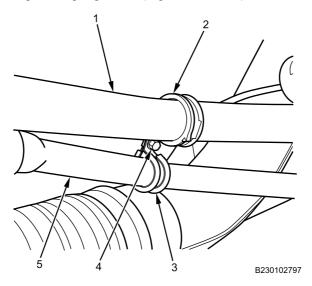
Oil Gauge Tube and Transmission Dipstick Retainer.
